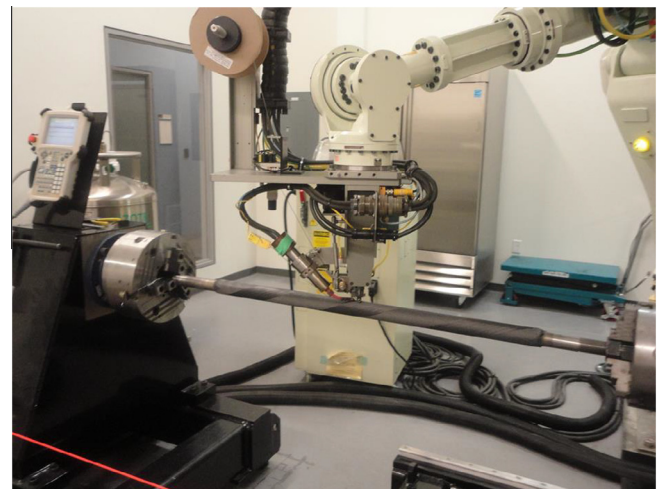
Manufacturing of the thermoplastic composite tube using a robotic AFP machine.
